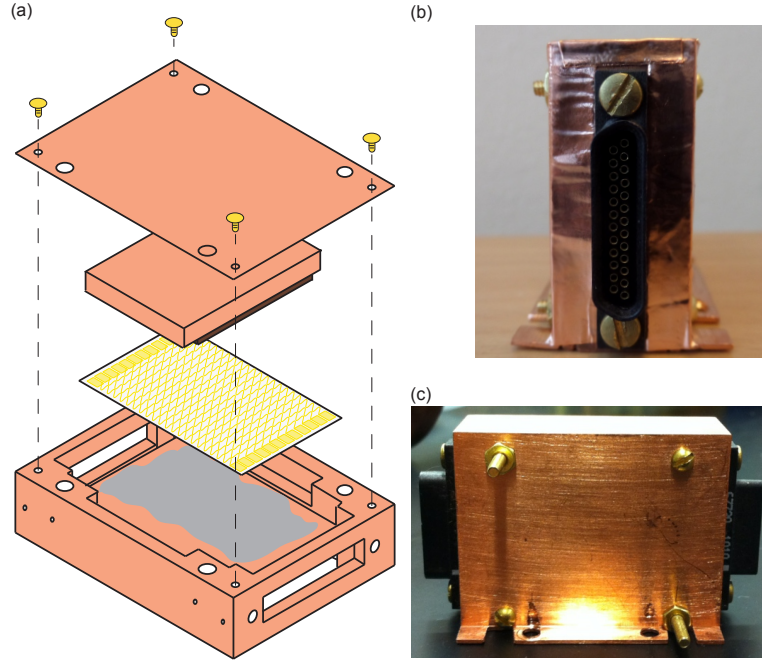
(a) Exploded view of Sapphire Box Assembly (b) Side view of Sapphire Box with Connectors in U-clamp which is eventually bolted to sample plate. The copper tape protects the wires from RF leakage (c) Front view of Sapphire Box with connectors inside of U-Clamp.
